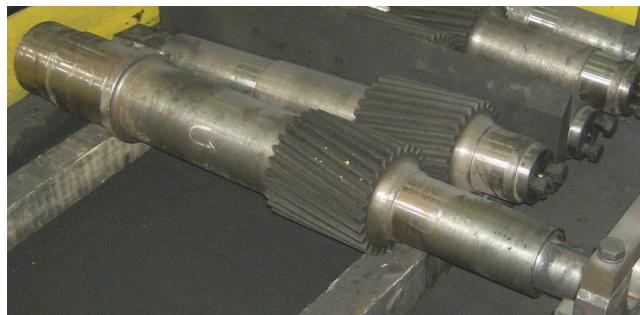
Toothed shaft after the repair welding of the broken part
